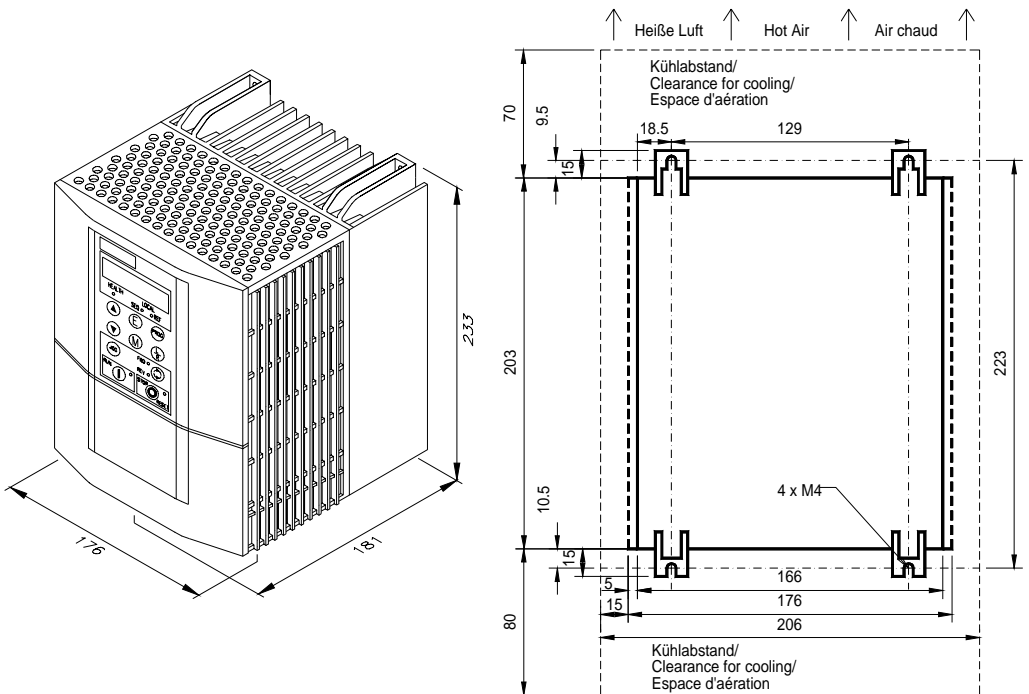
Outline drawing and mounting MM422-EMC und MM515...540-EMC
